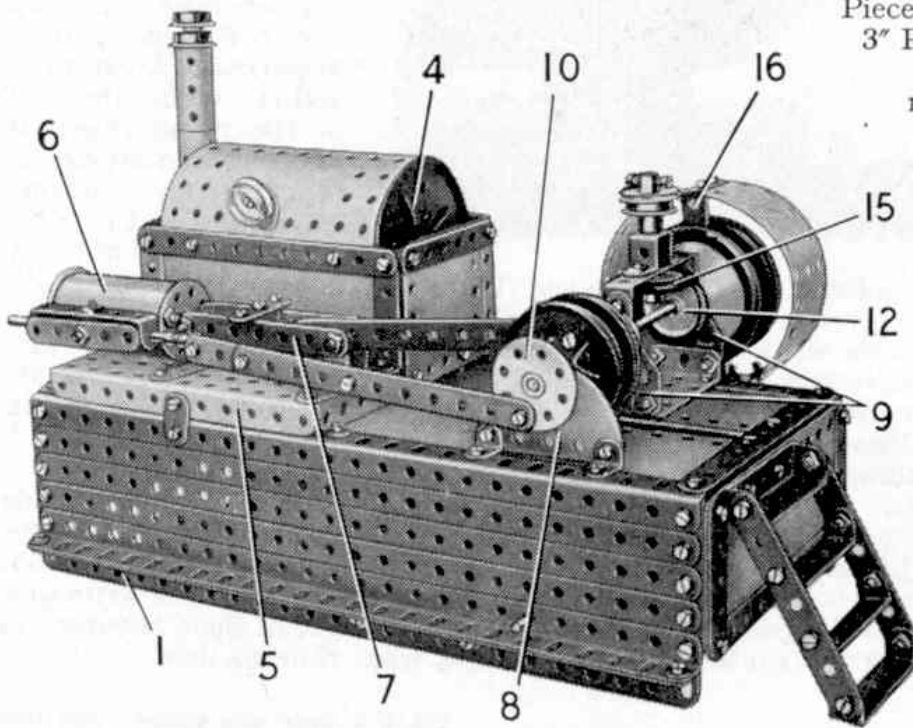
A steam power plant that can be built from the parts in Outfit No. 7.
